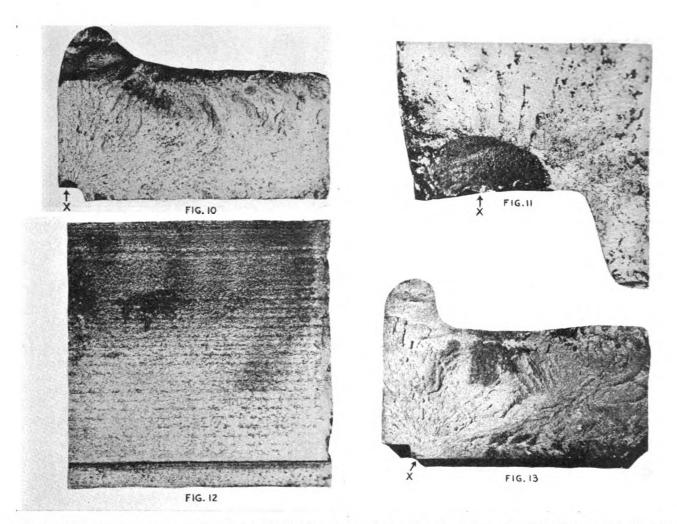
One of the fractures in the tire, the machine finish in the bore of which is shown in Fig. 9. The fatigue crack in this instance started in the counterbore. Fig. 11—Enlarged view of fatigue crack shown in Fig. 10. Fig. 12—Another example of rough machine work in boring a tire. The roughness is smoothed somewhat by corrosion. Fig. 13—This fatigue crack may appear insignificant, but it caused the tire to fracture. The machine finish of the bore is shown in Fig. 12
